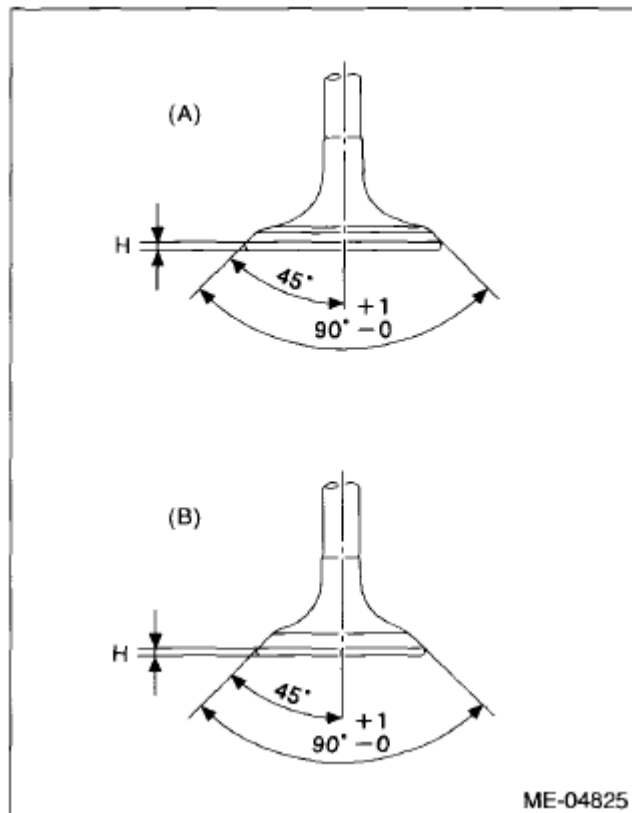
Identifying Valve Overall Length And Head Edge Thickness
